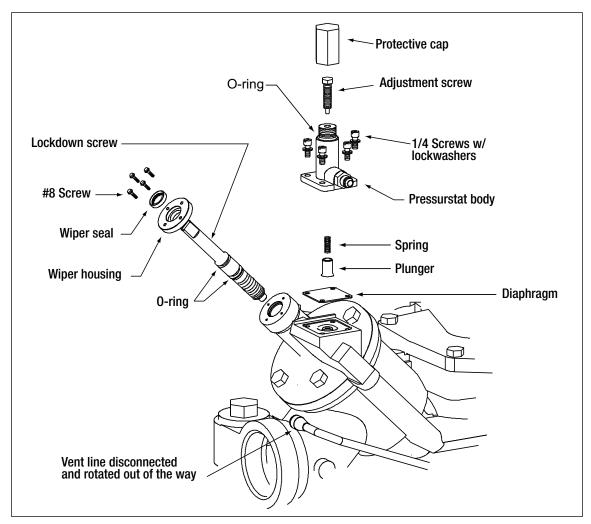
Pressurstat and Check Valve Lock-Down Screw Assembly
